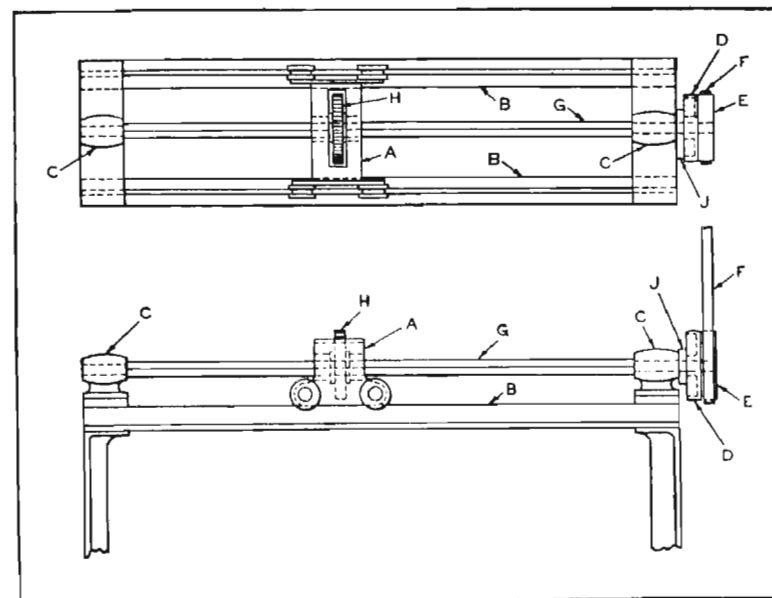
(Top) Plan View of Wire-stitching Machine Frame and Carriage; (Bottom) Front View of the Machine.
